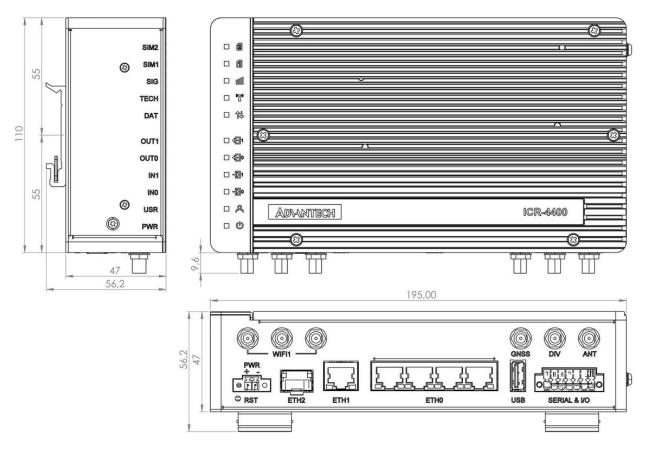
Router dimensions – front, top and right view with DIN rail clip
